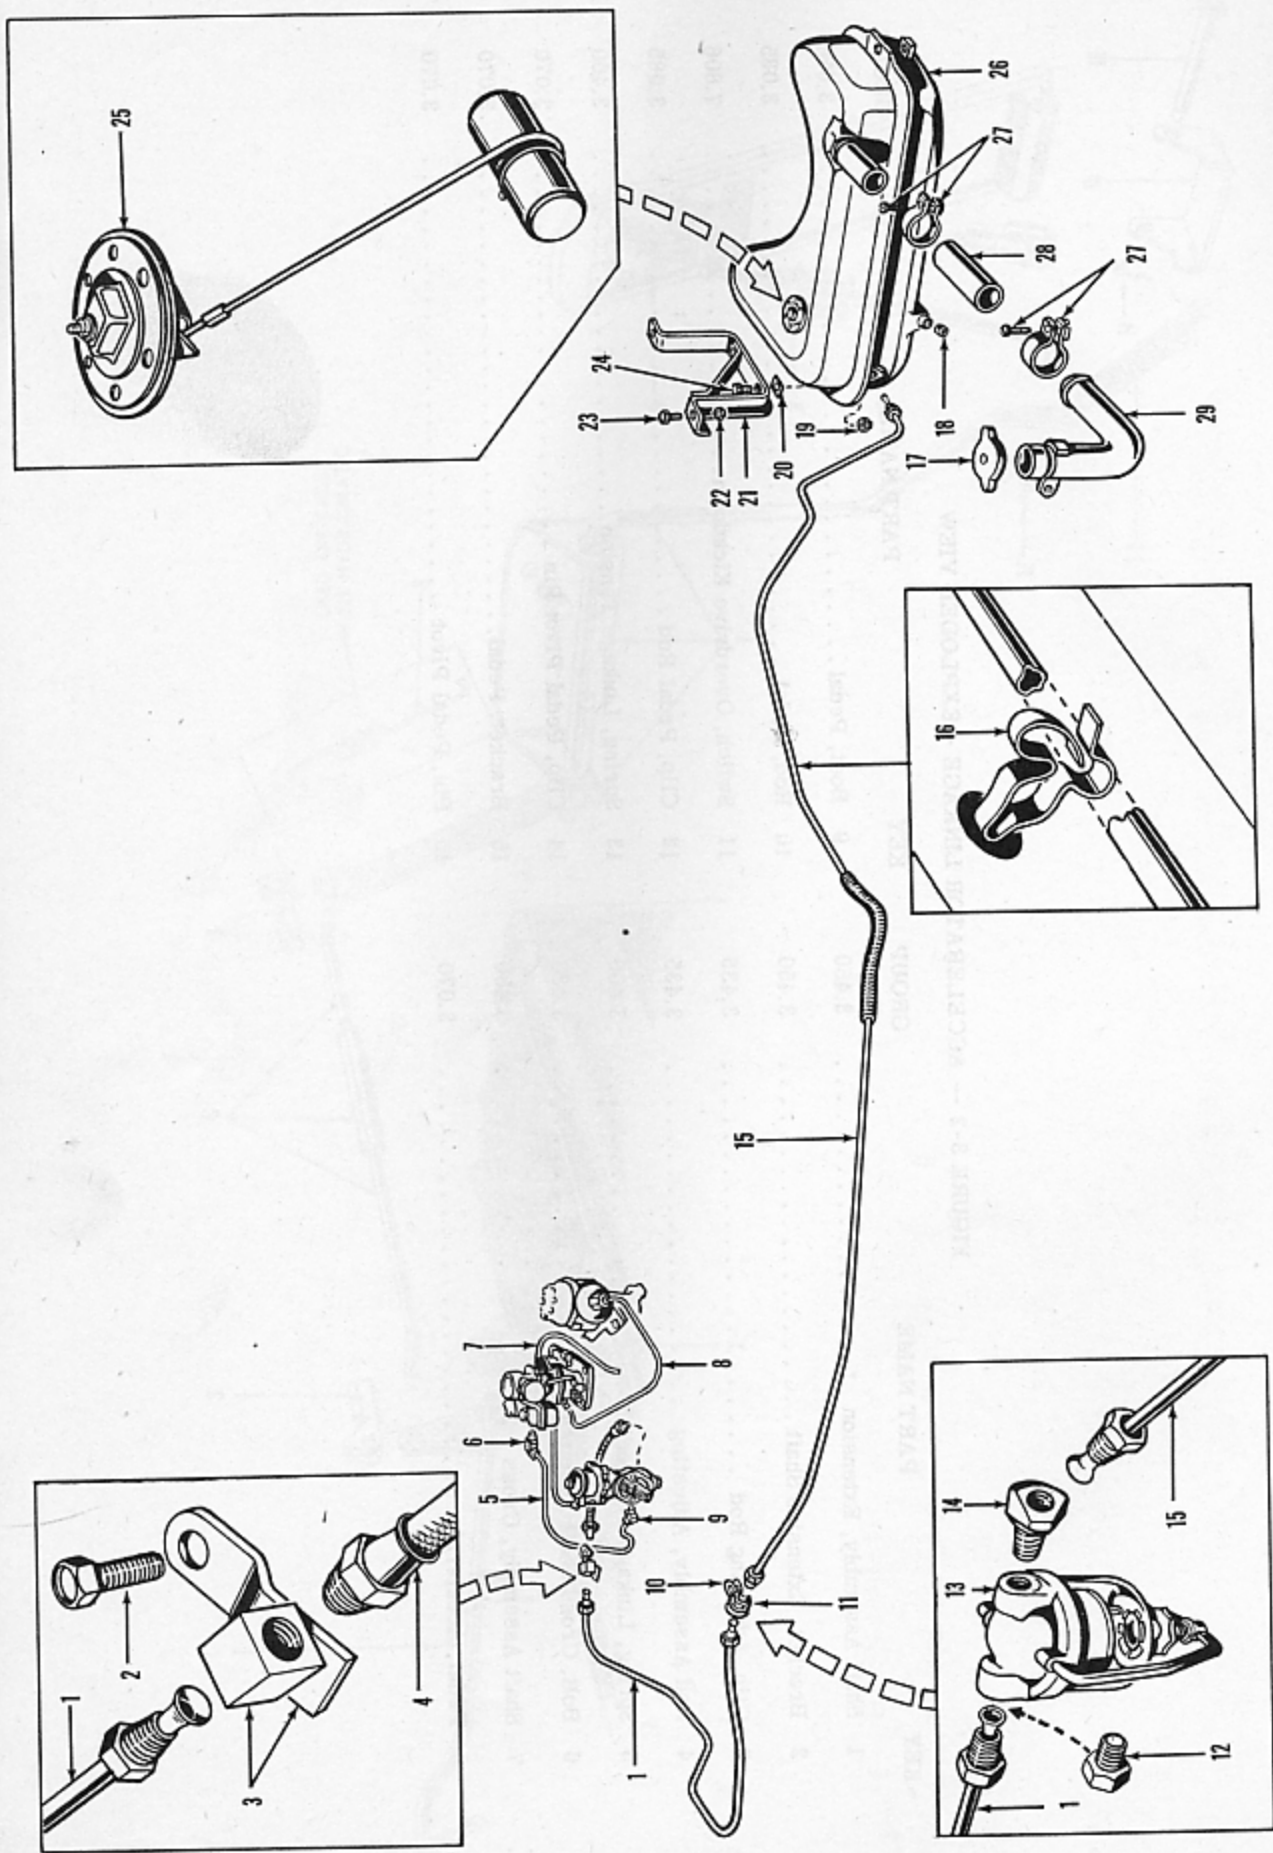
CHASSIS FUEL AND VACUUM LINES - INSTALLED VIEW
